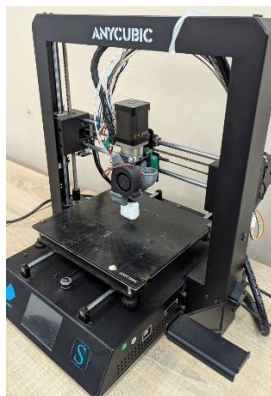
Anycubic Mega S 3D printer equipped with a screw extruder for printing composite mixtures
